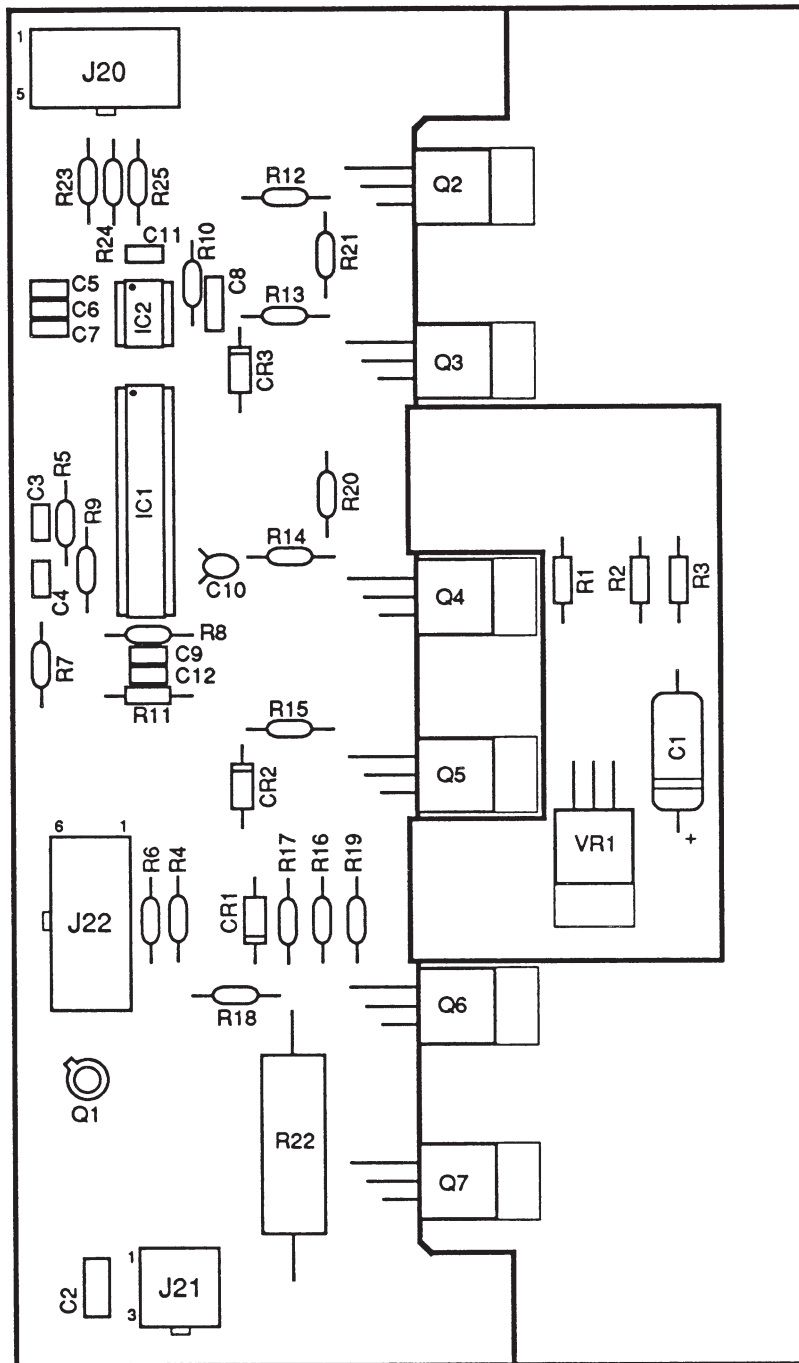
Motor Control Printed Circuit Board Assembly, PN 78230 Revision 0
